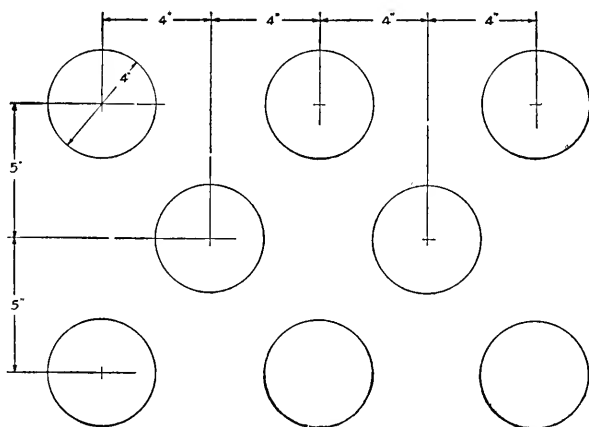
TUBE SPACING IN TYPES B AND D BOILERS.
